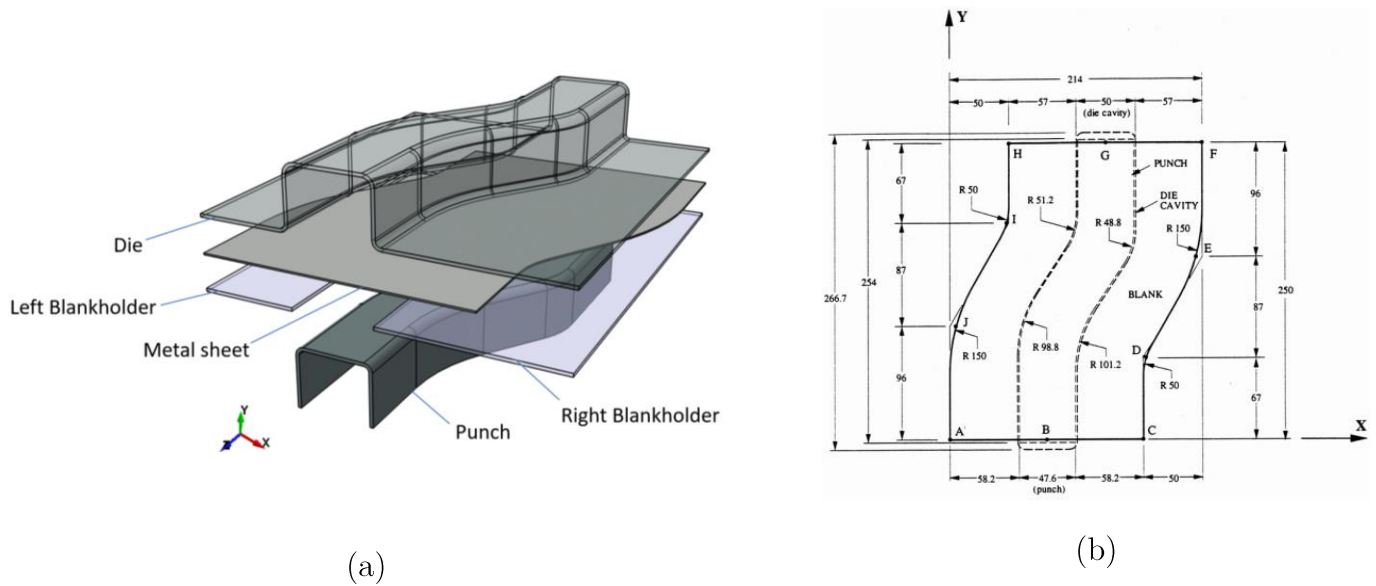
(a) Geometrical assembly configuration of the S-Rail forming process. This is a much more realistic test which shows all the difficulties typically found in car part (b) S-Rail mechanical drawing from [23]
